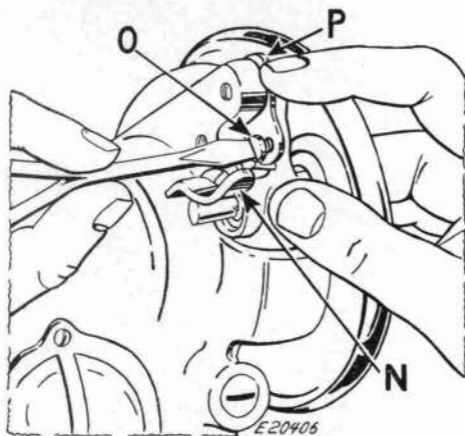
ADJUSTMENT OF BOBBIN WINDER
